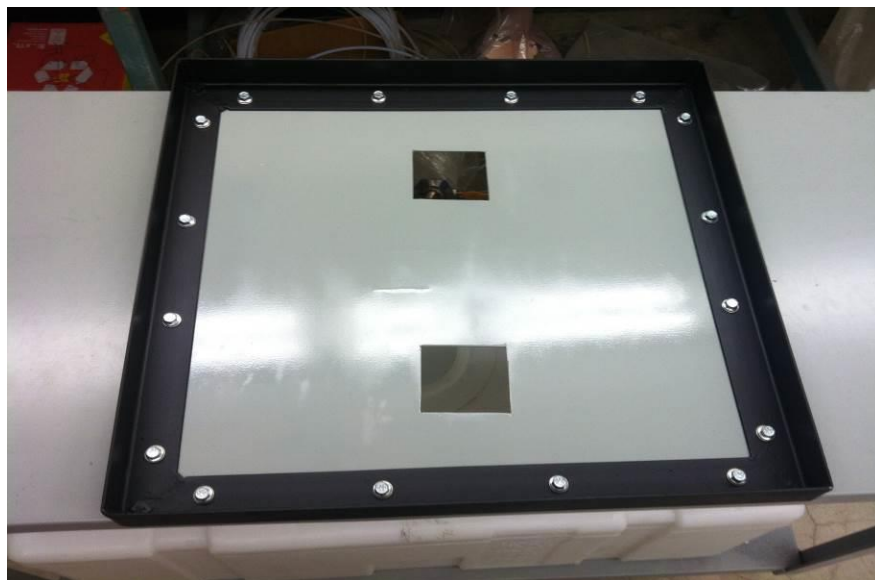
Welded base on the cart prior to hole drilling.
